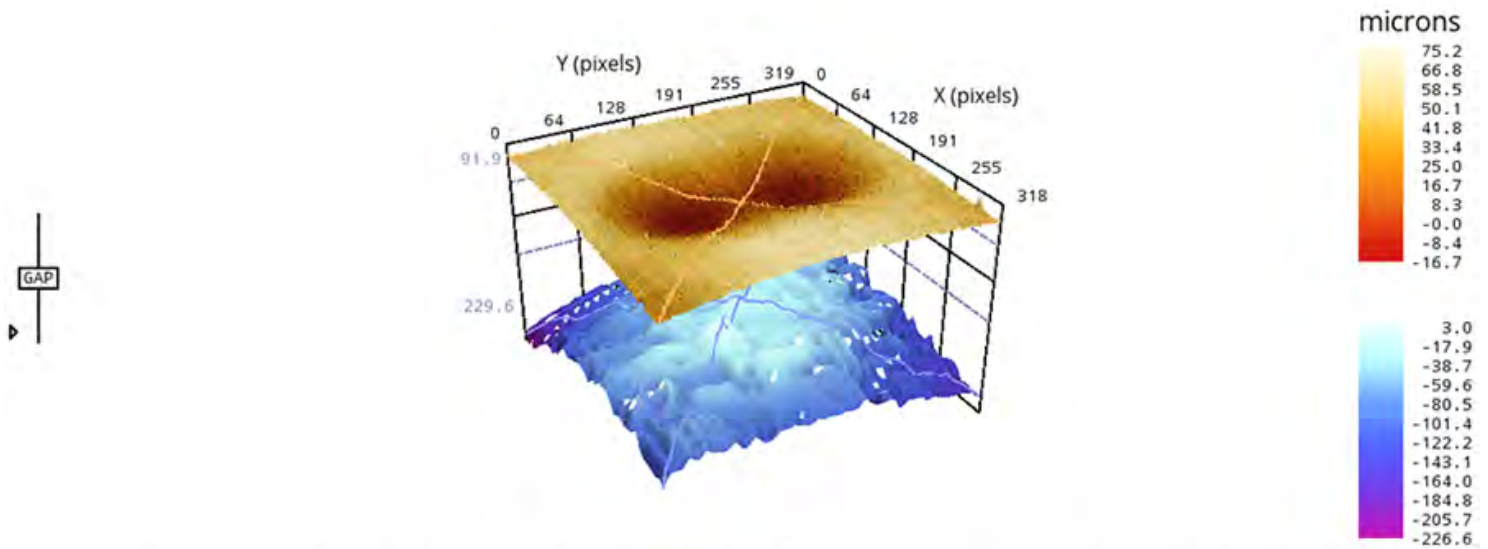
Solder liquidus (220°C) interface analysis between smaller BGA 1 and PCB 1 – ROI 2.
